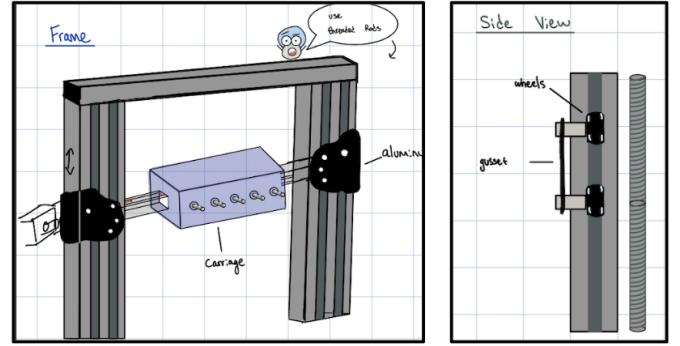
Concept Sketch of Gantry System. Left: front view with carriage; right: side view showing lead screw and guide wheels.
